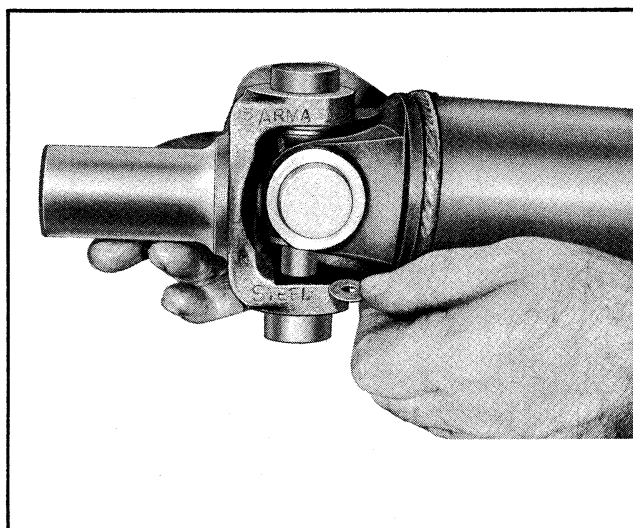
A-5 Placing Washers Inside Bearing of Splined Yoke Member
